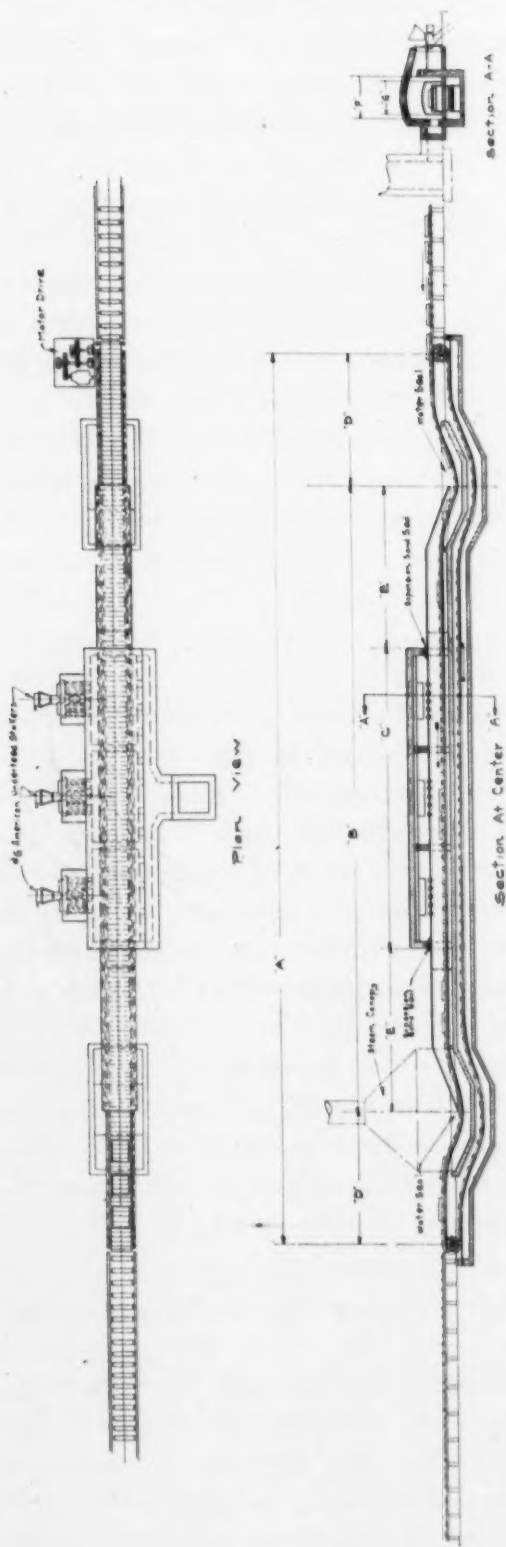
Continuous Muffle Annealing Furnace for Sheet Steel Annealing. This Furnace Would Eliminate the Heating of Bottoms and Covers of Boxes.
